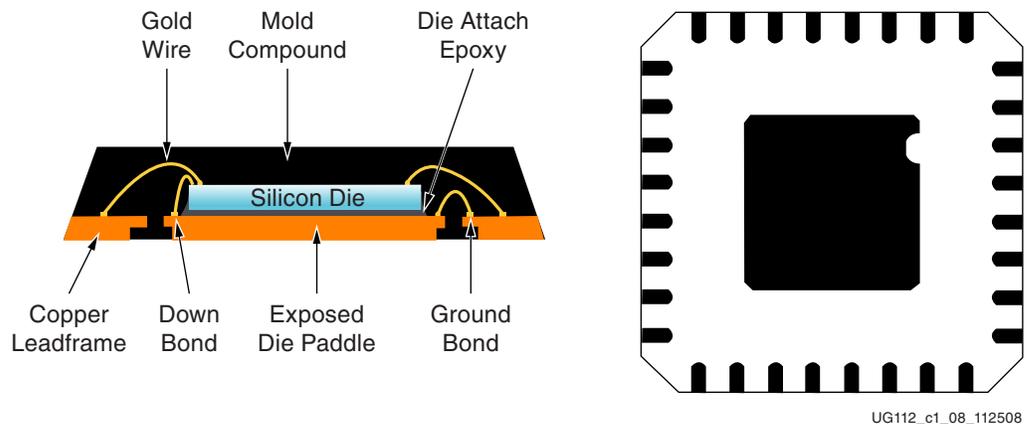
QFN Cross Section (Left) and Bottom View (Right)
